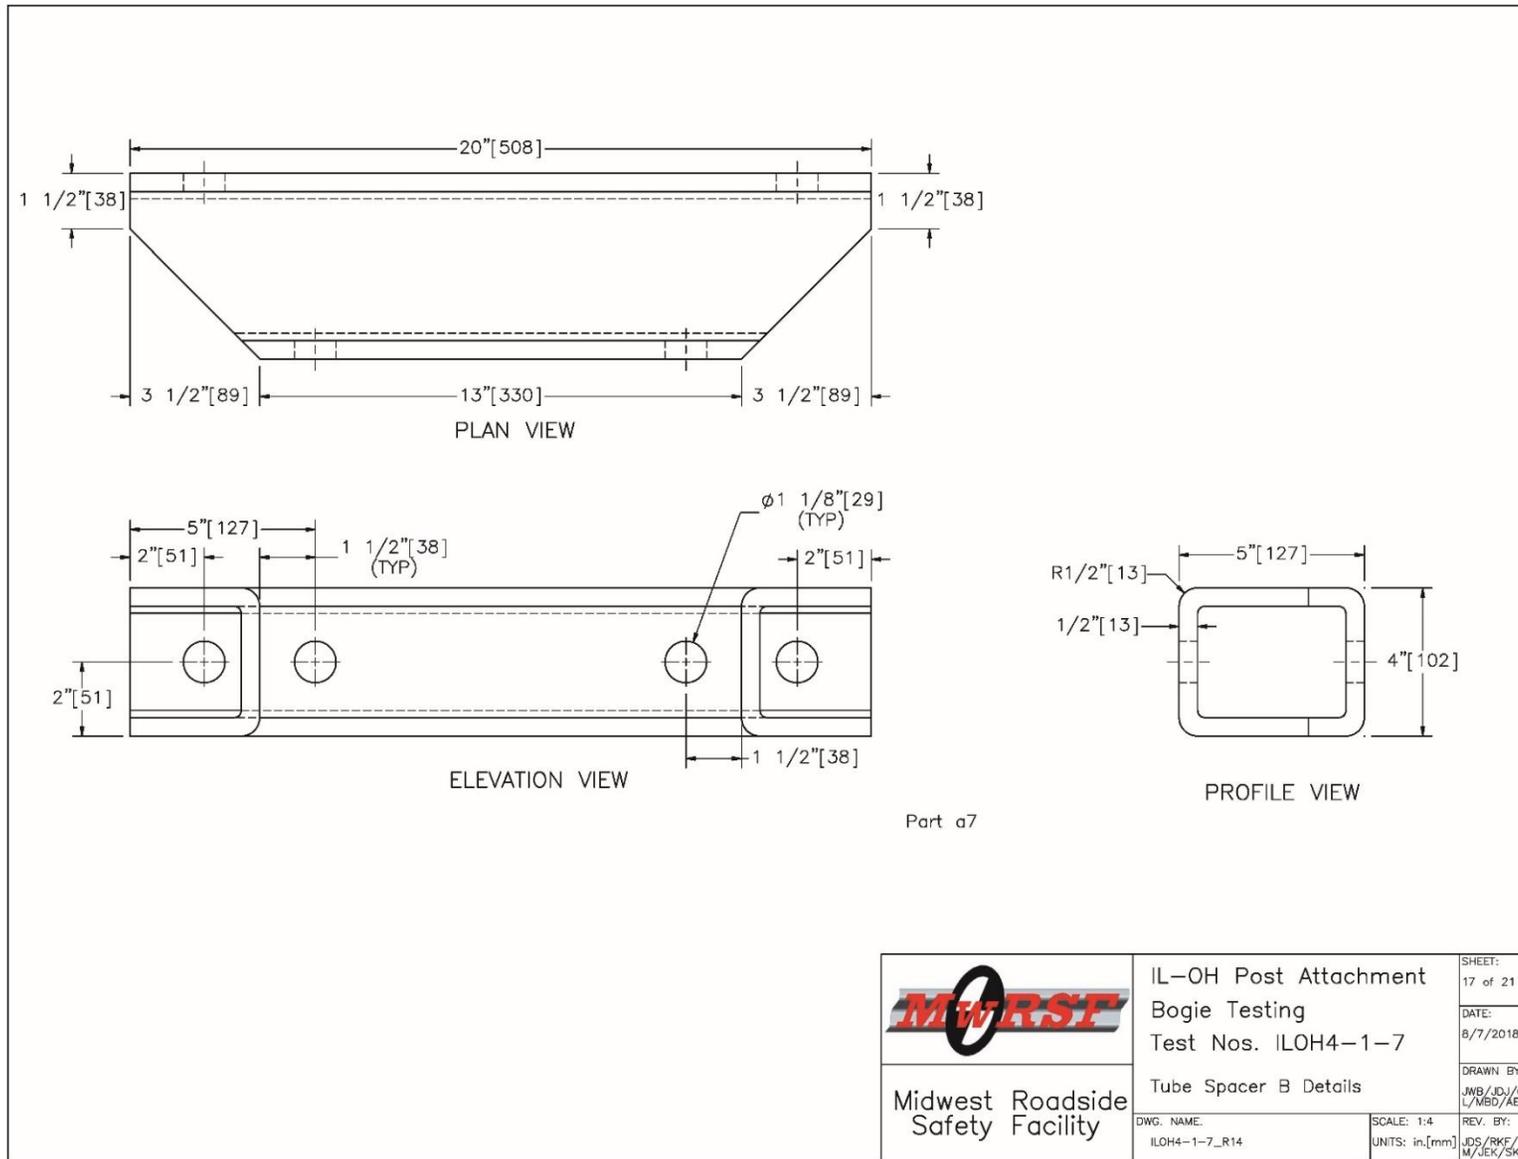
Tube Spacer B Details, HSS5x4x1/2
